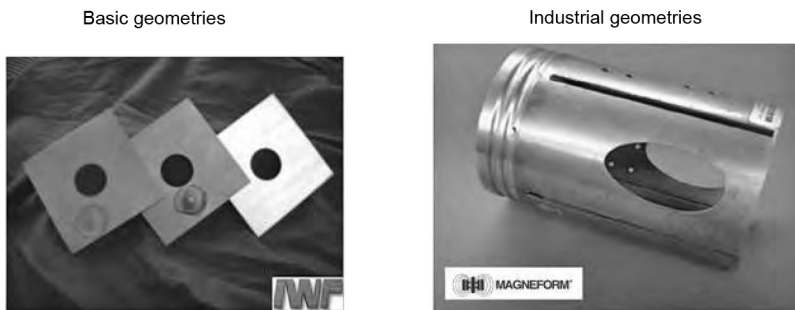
Example parts manufactured by blanking and piercing. Source: Ref 11.52, 11.71
